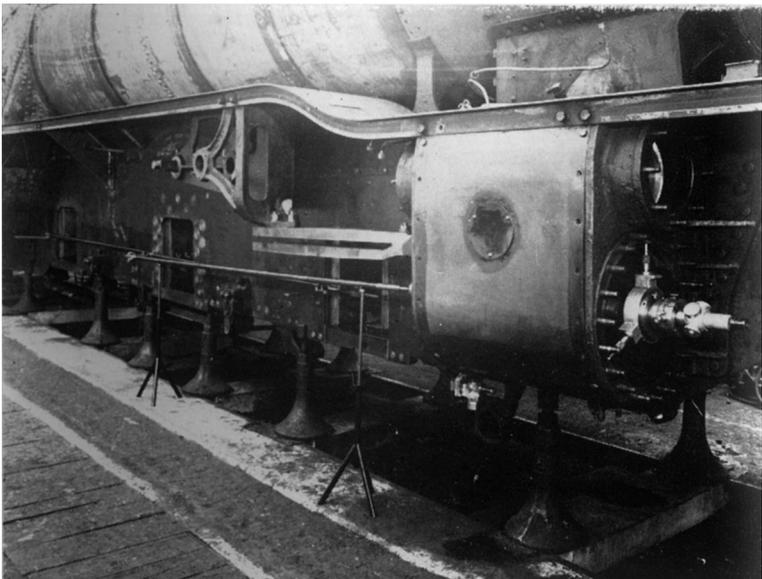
A. *Front view of locomotive shewing telescope and length-gauging rods in position.
